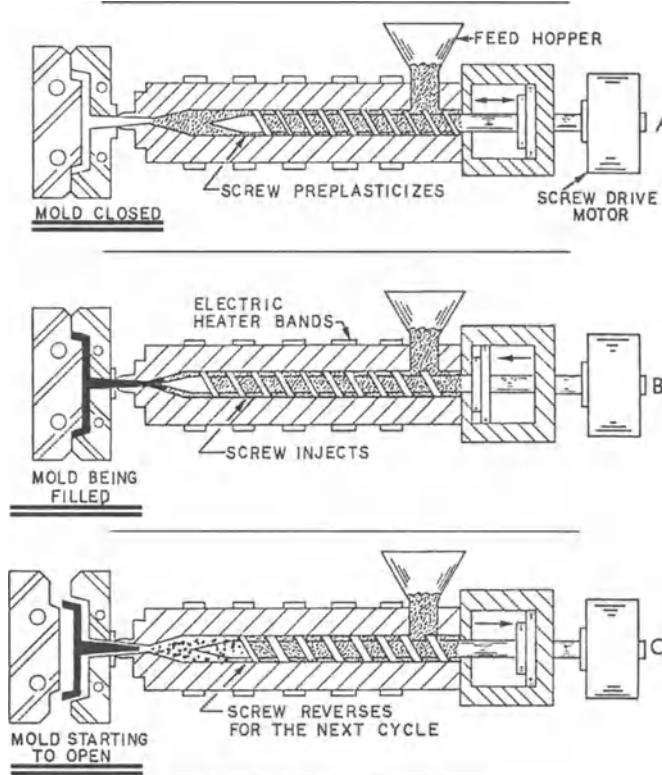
Sequence of operations for a reciprocating screw machine.
